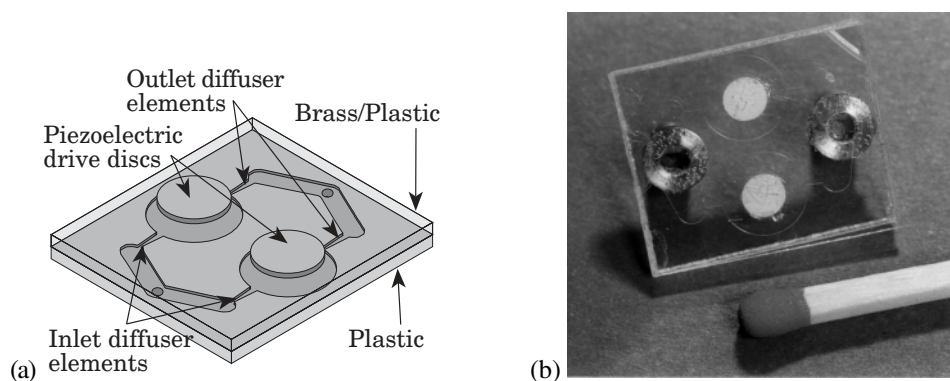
(a) A perspective view of a valve-less diffuser double-chamber micropump fabricated using thermoplastic replication and (b) a photo of a mounted injection molded pump fabricated in polycarbonate (chip size for both pumps  $15 \times 17 \times 1.4 \text{ mm}^3$ ).
